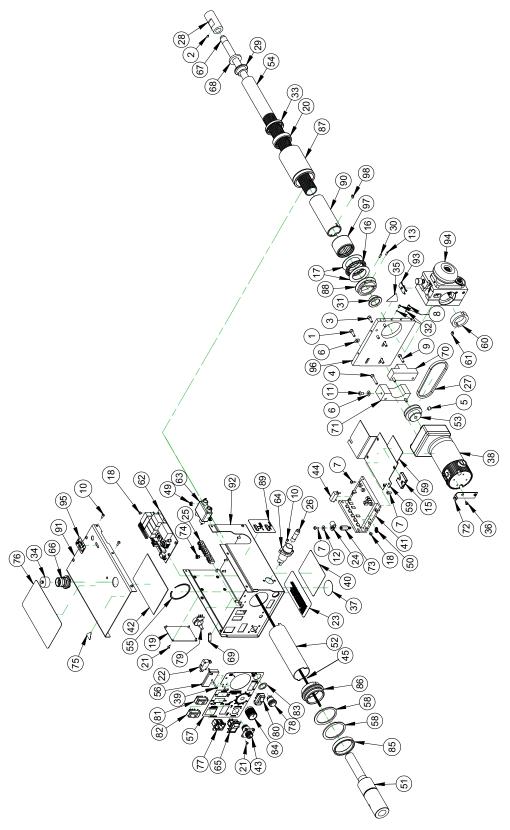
BW2600 ASSEMBLY (P/N 91579)
